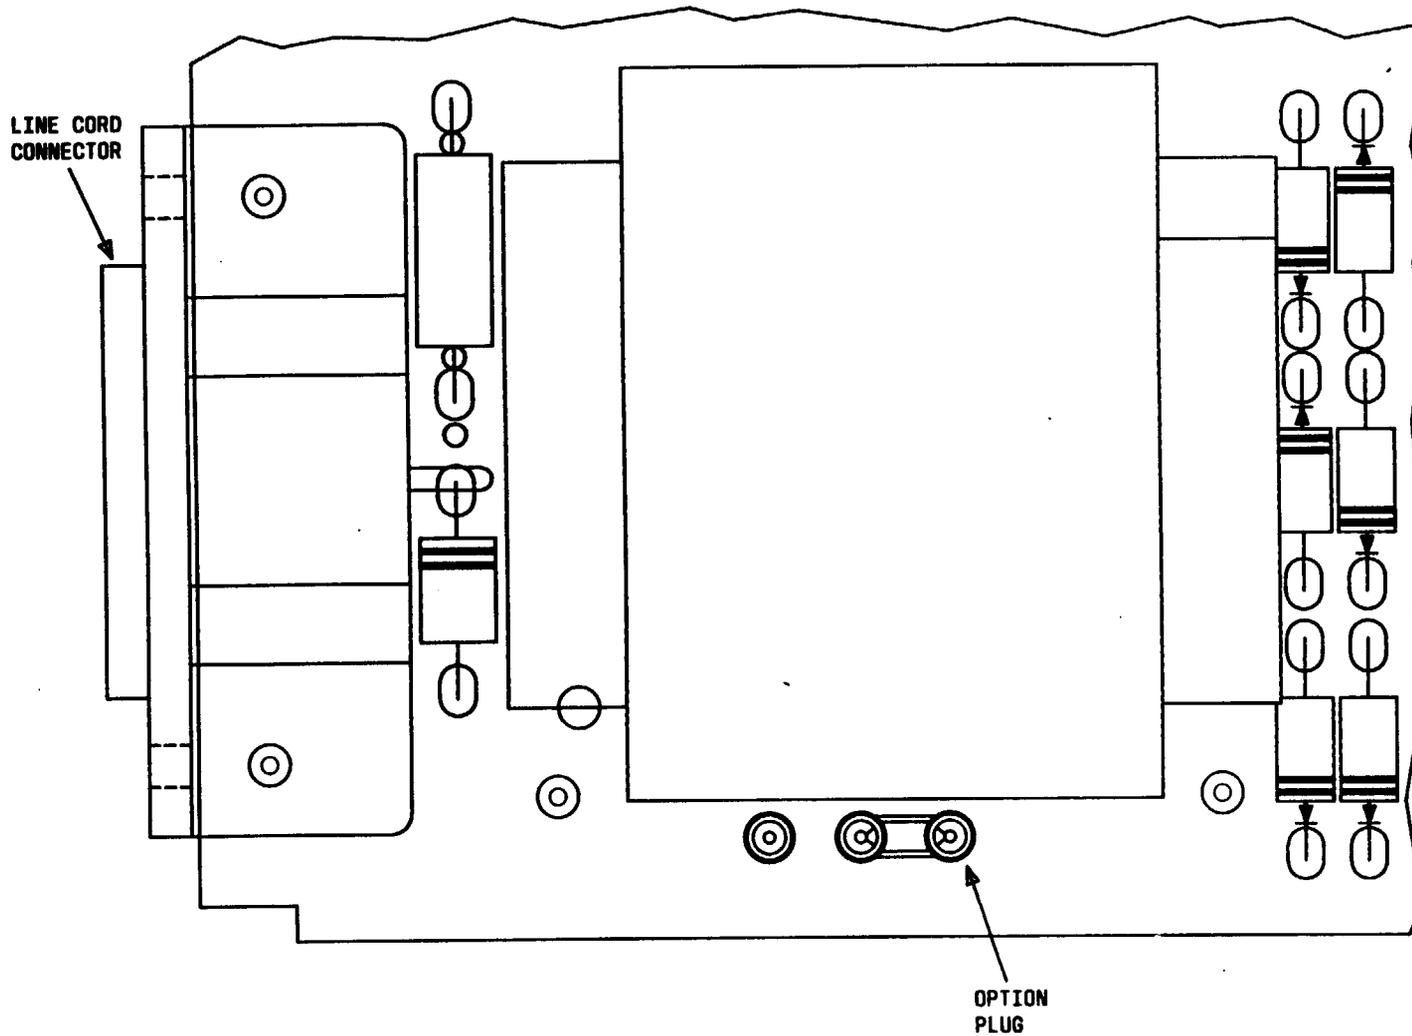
554A-Type CSU Component Layout Showing Ground Plug Location
